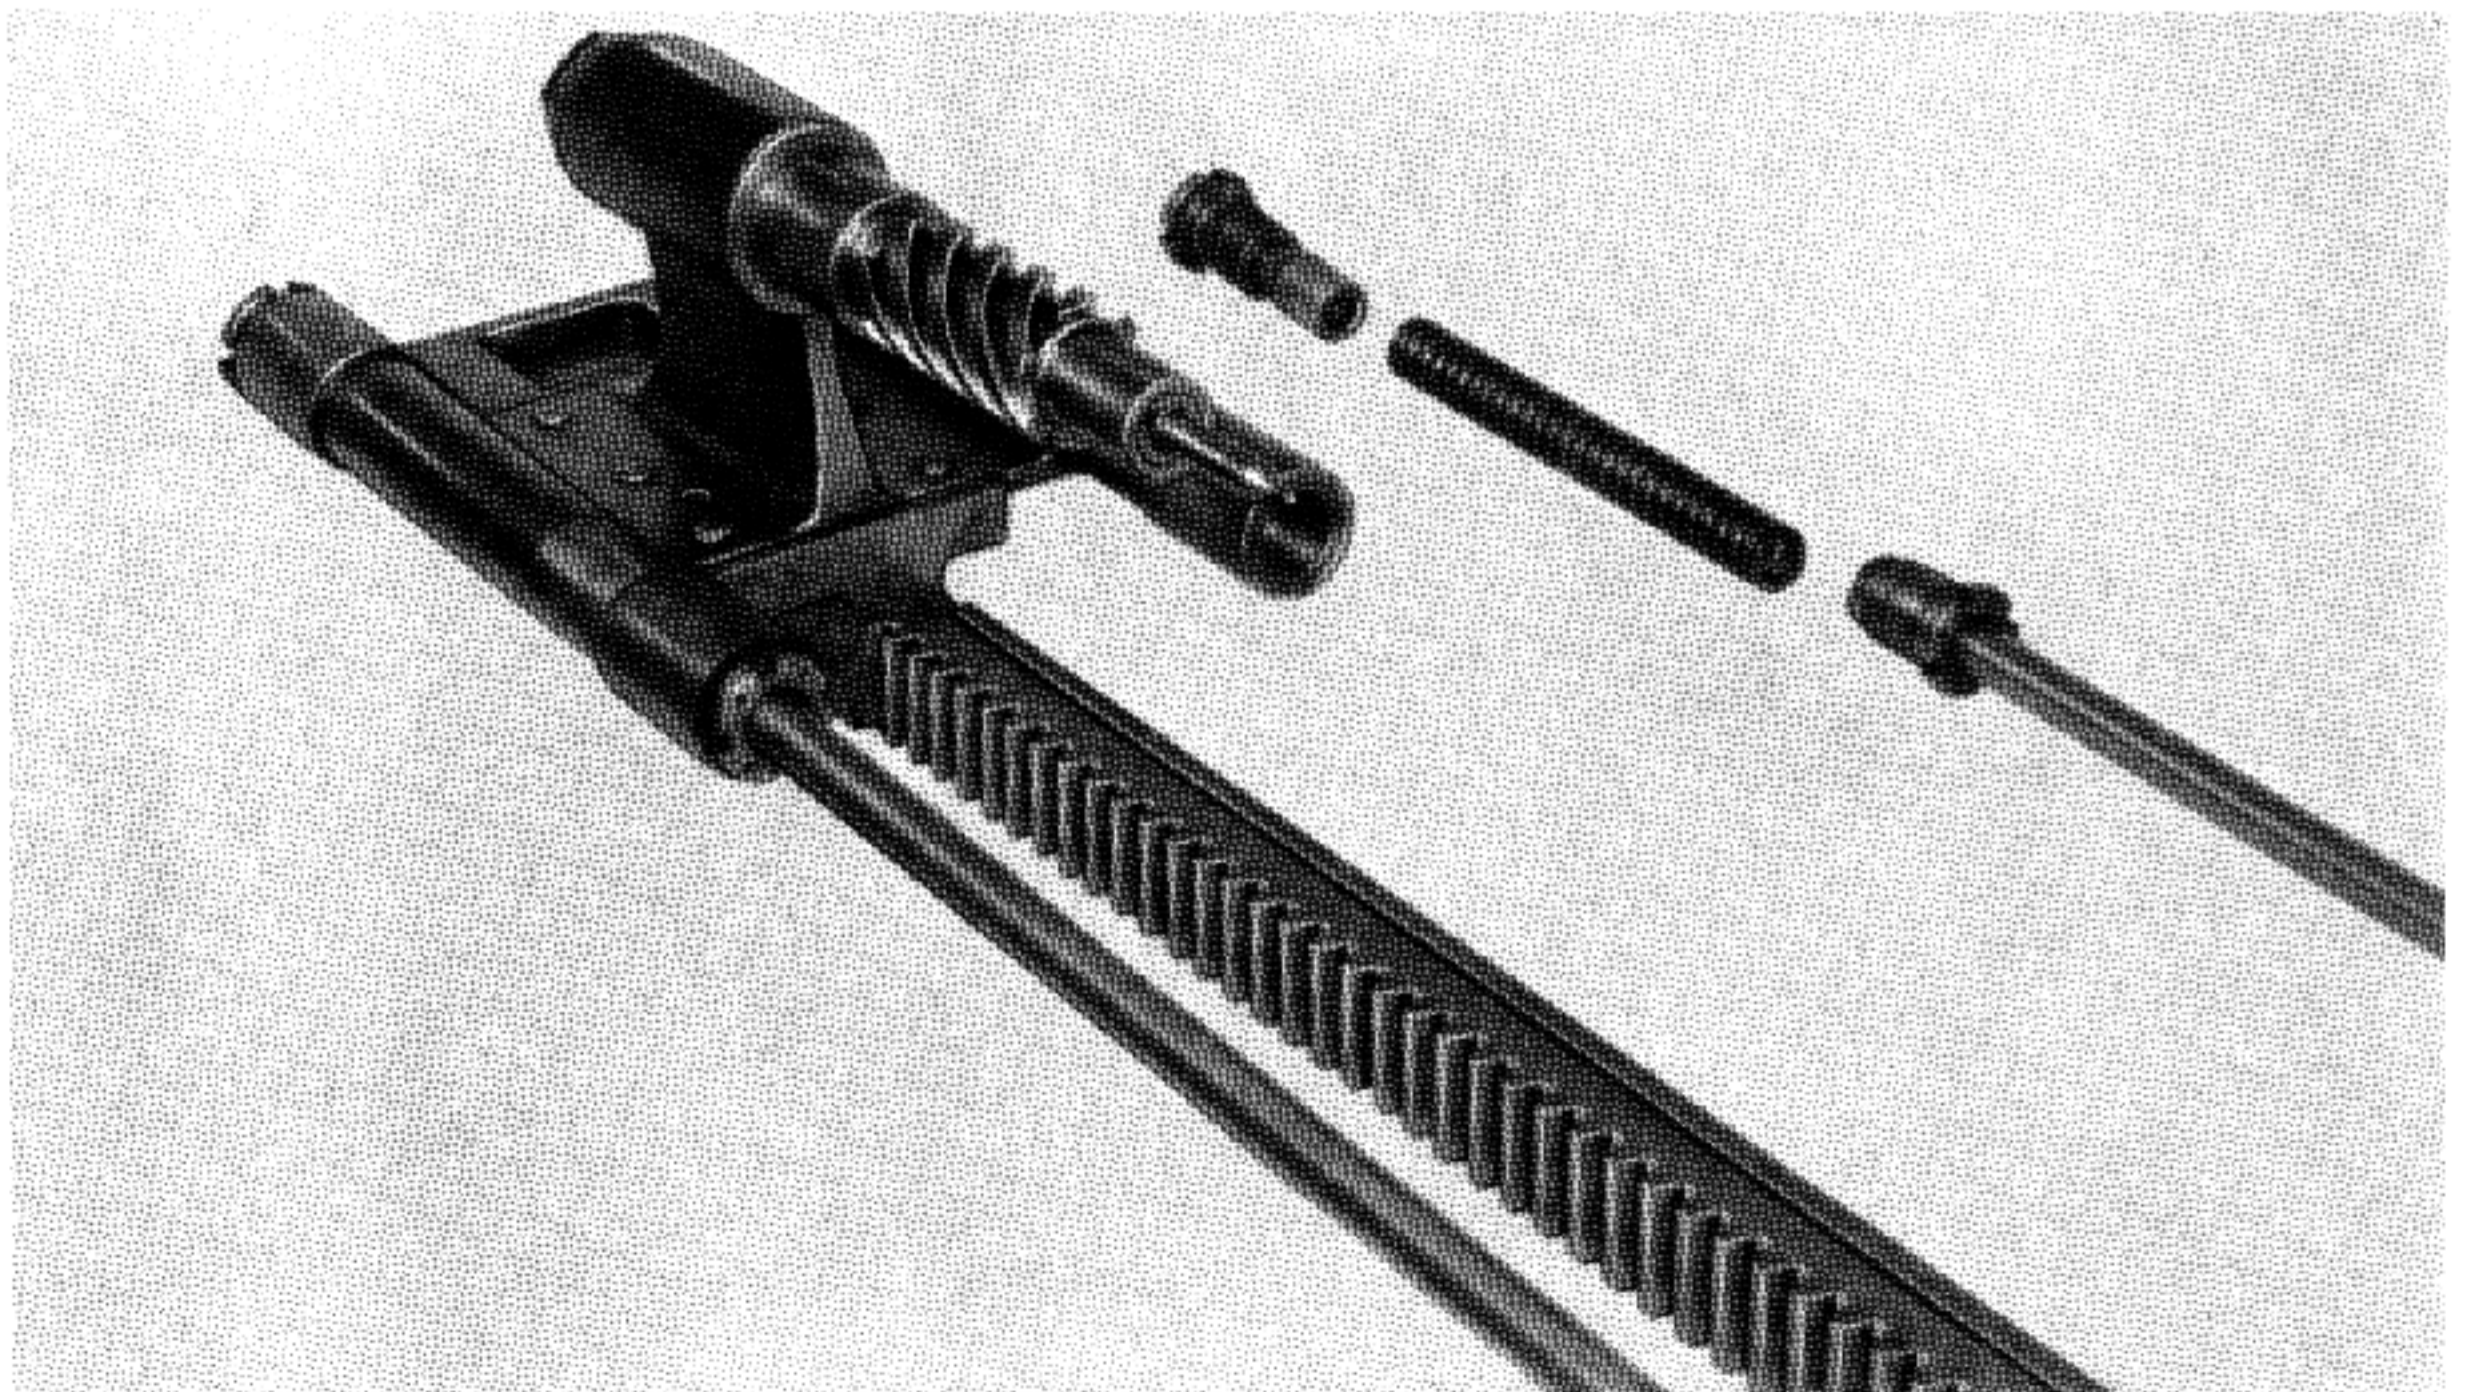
Experimental Italian 47-mm Aircraft Machine Gun, showing breechblock carrier.
